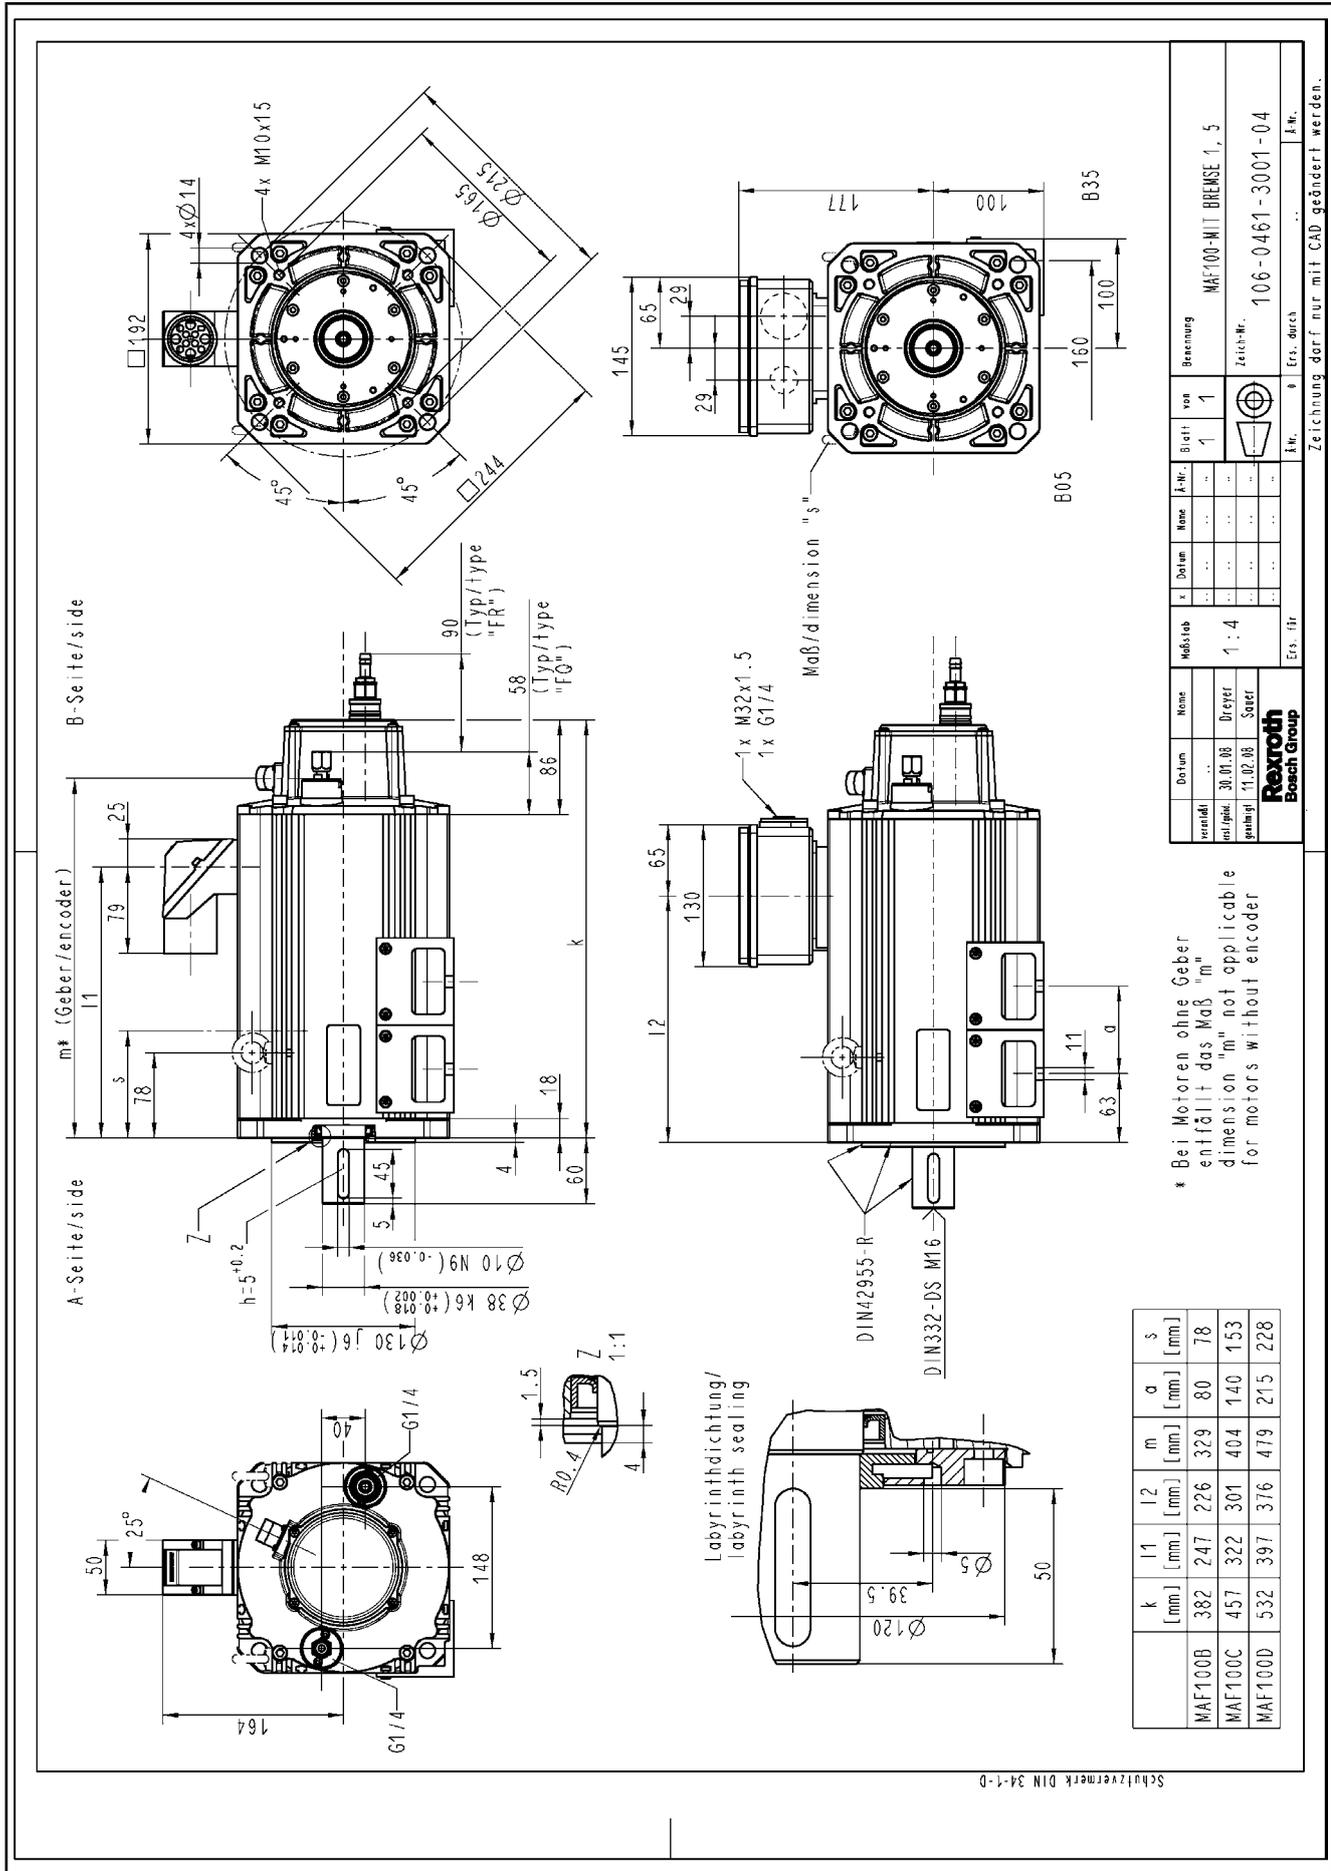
Dimension sheet MAF100 with brake 1 or 5
